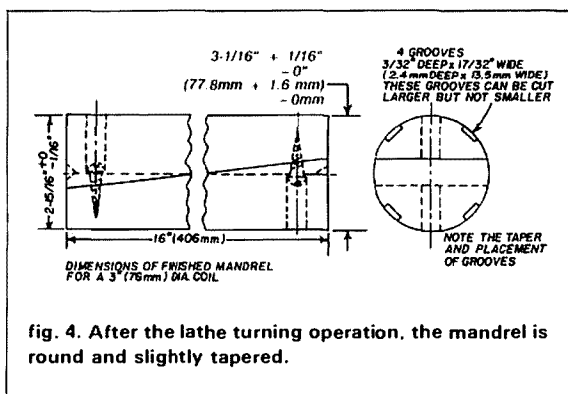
After the lathe turning operation, the mandrel is round and slightly tapered.
